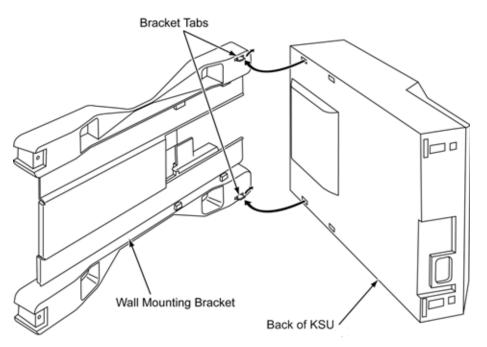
Attach 9.5" Chassis to Wall Mounting Bracket
